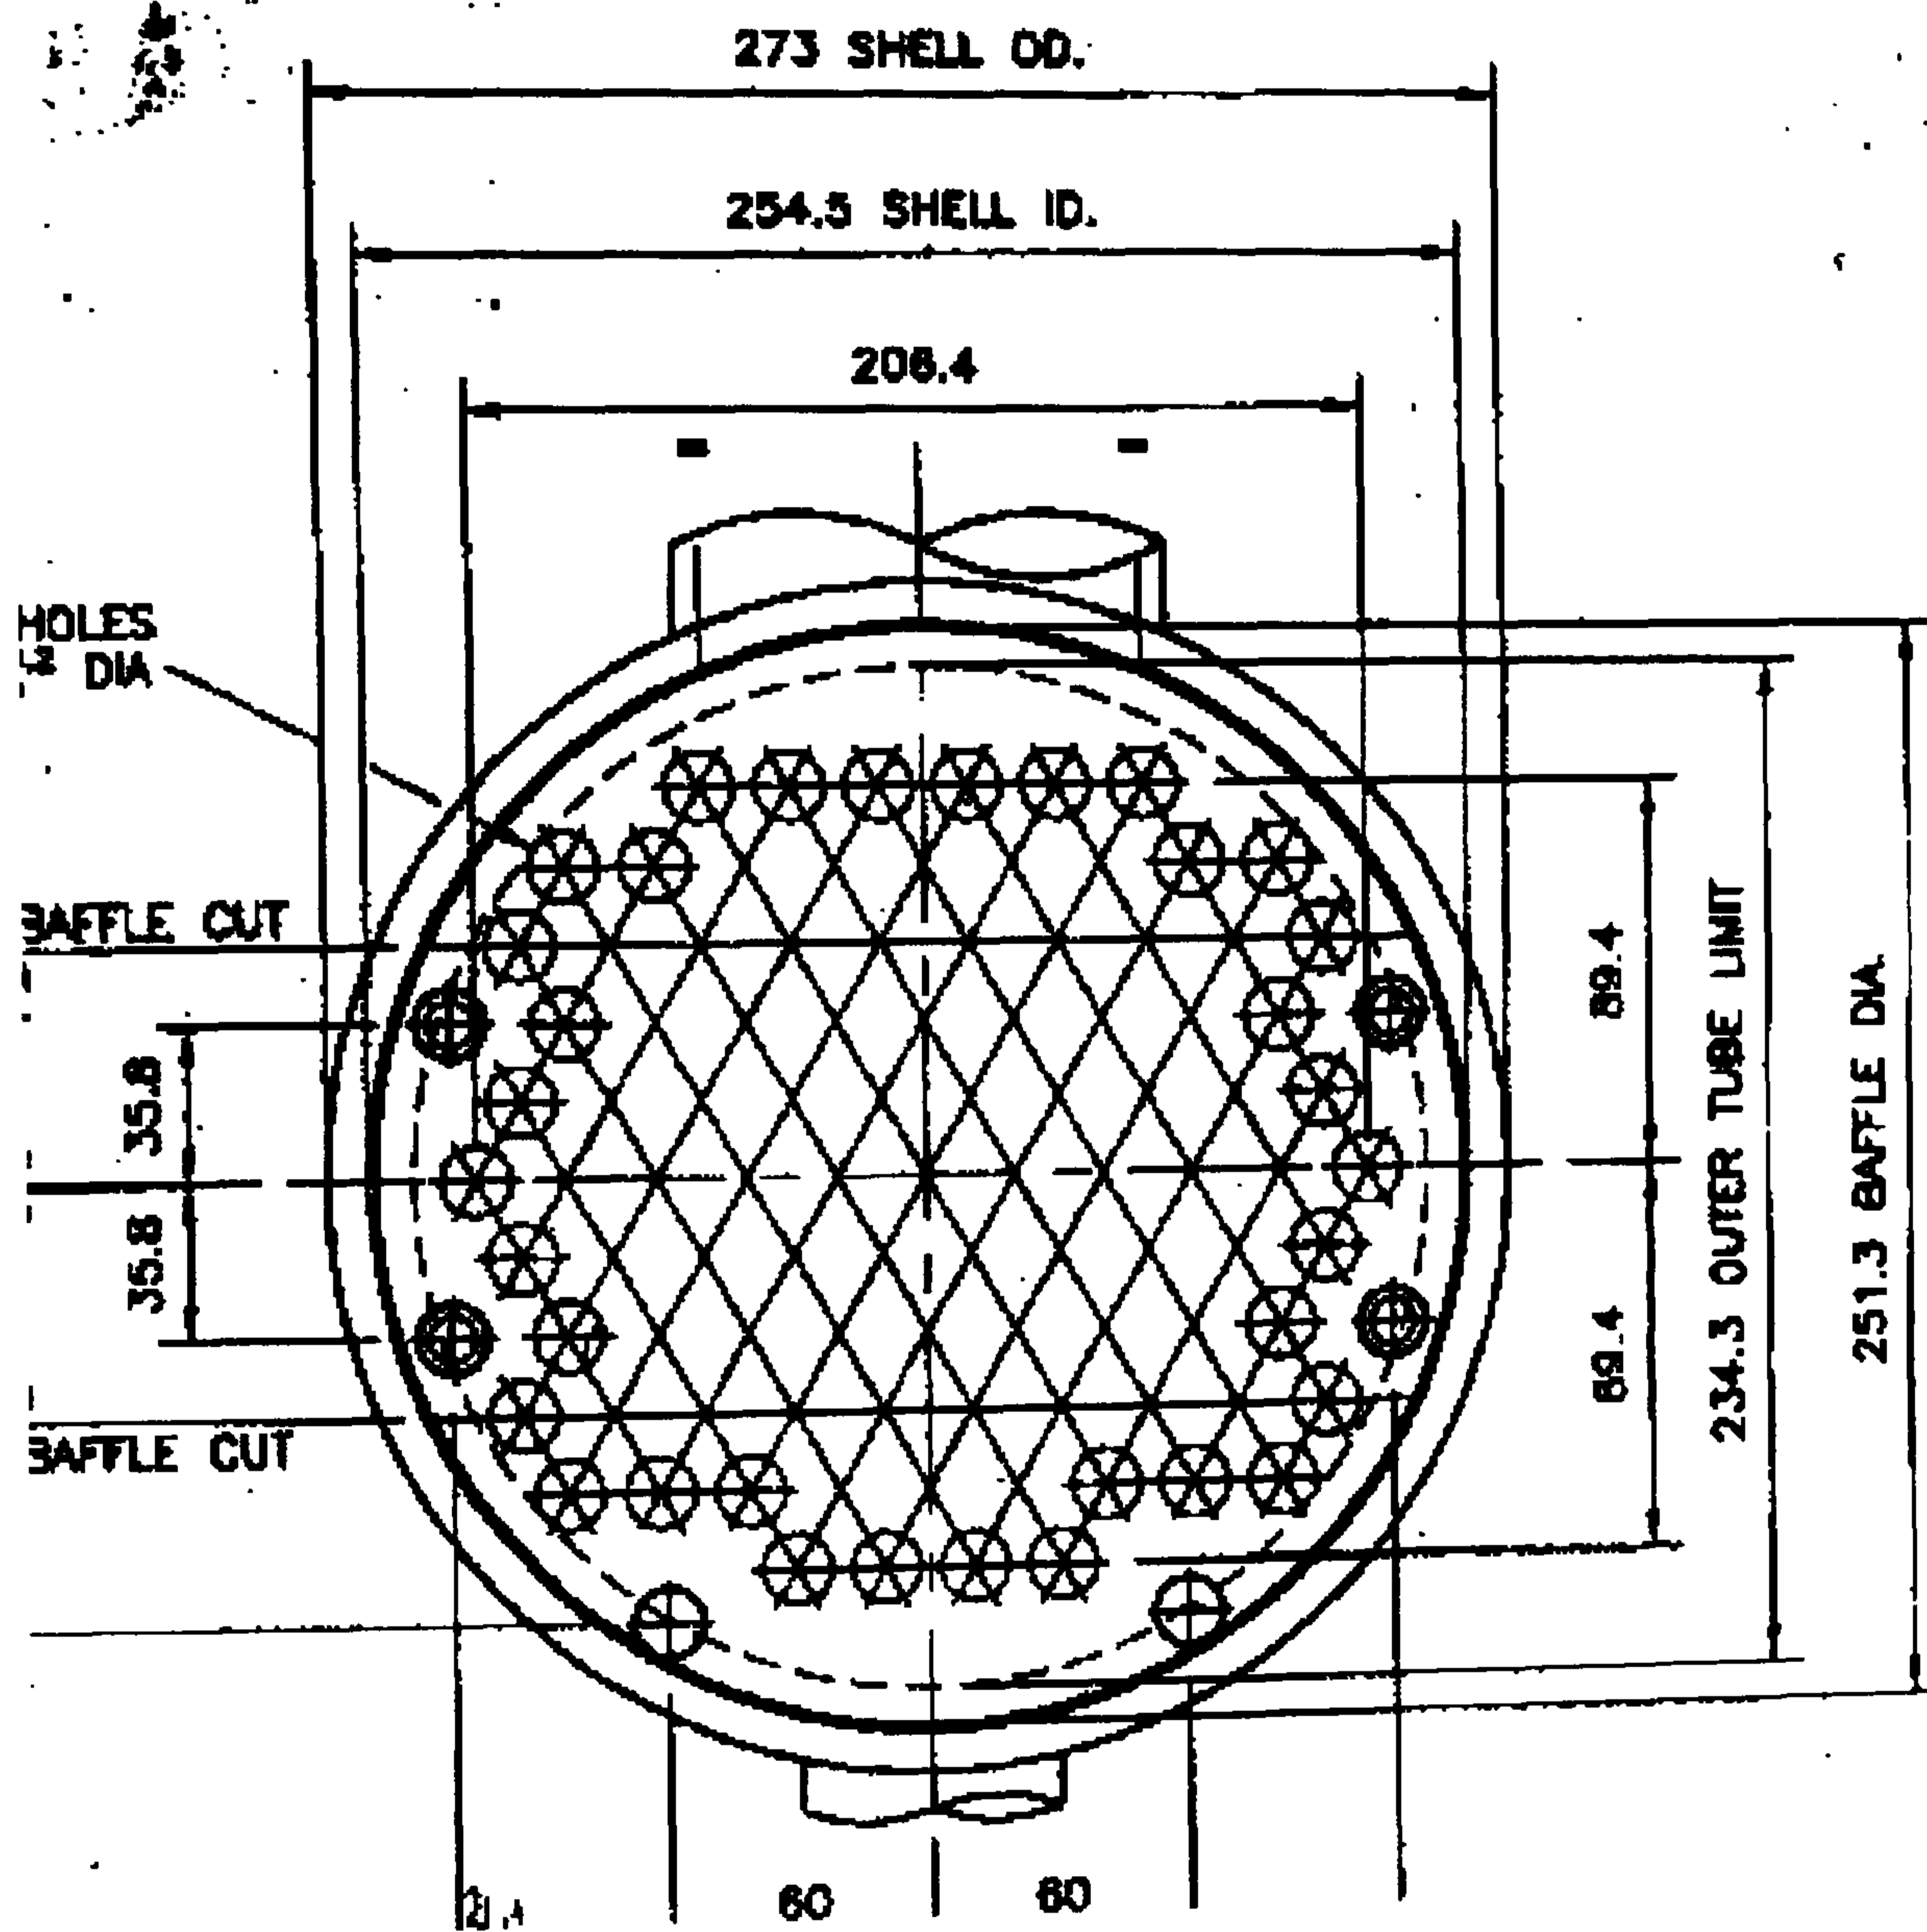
Dimensions of Tube Bundle Layout (with horizontal baffle cut)
